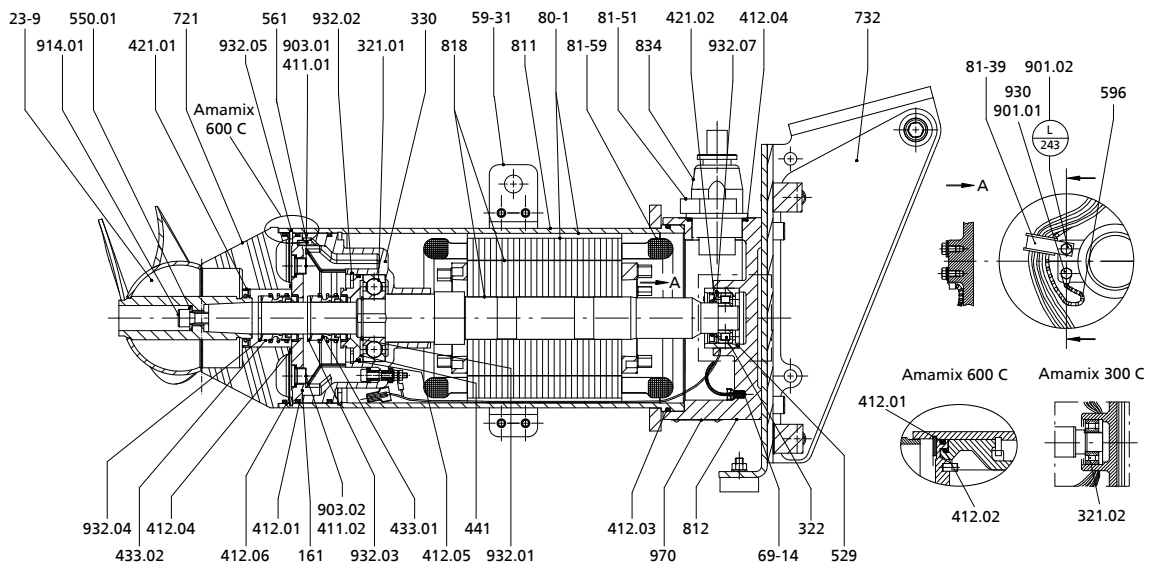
General assembly drawing of Amamix 300/400/600, motor housing material stainless steel
